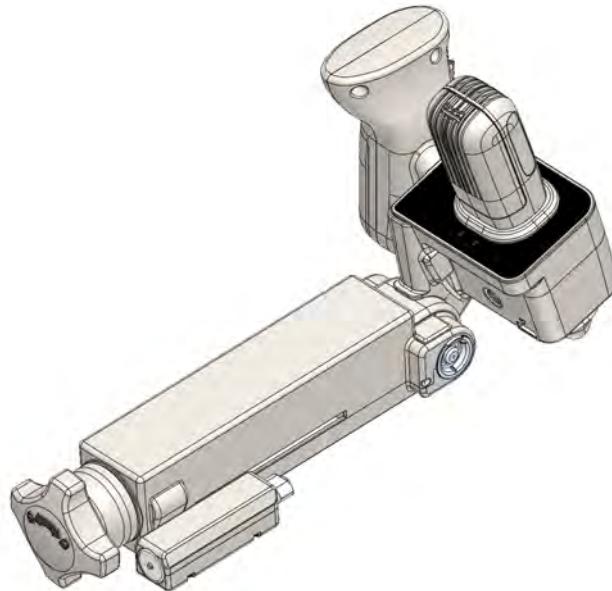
CERTA Access Device prior to inserting Verification Tool.
